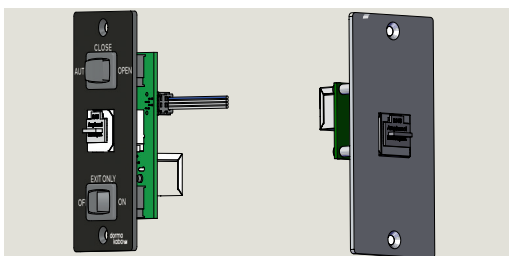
Program switch panel and RJ 45 plate assembly
